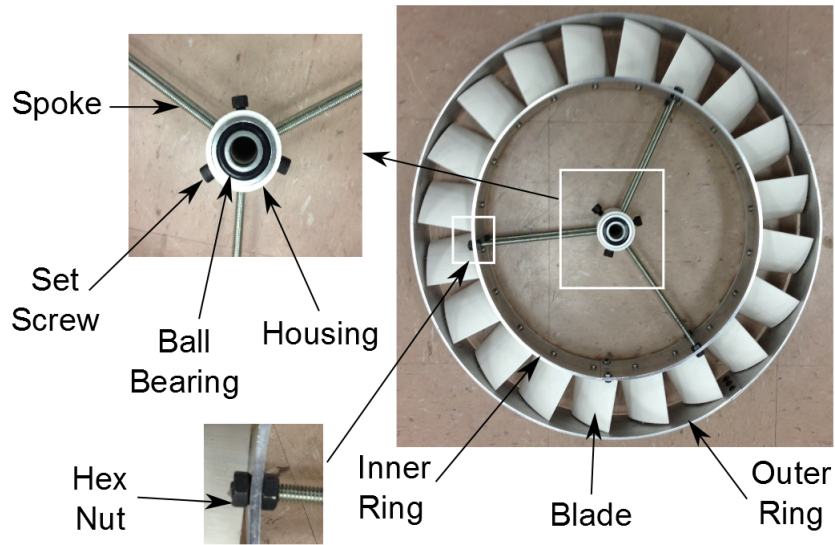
Bigger stage of the Zephyry wind turbine: assembly and different parts.
